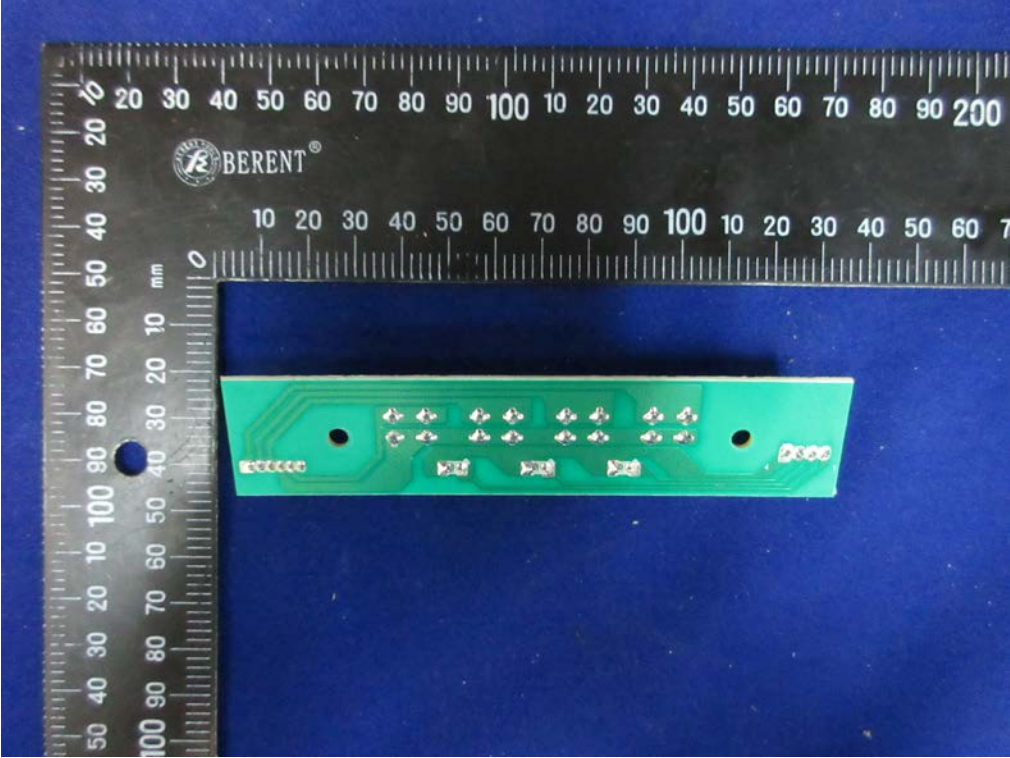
FlinInfini Lite 5kW-48V PCB of panel board trace view
